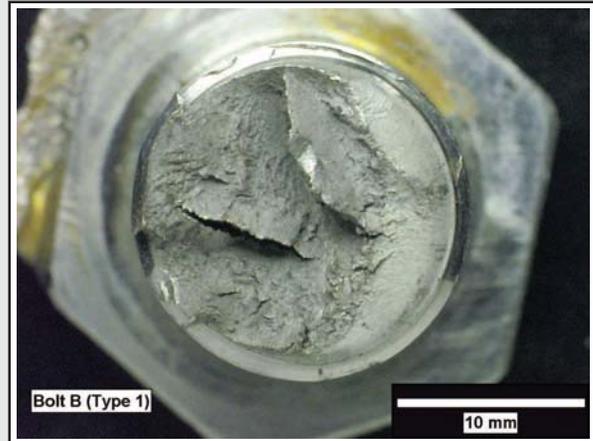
Fracture surface of bolt B (type 1 bolt)
